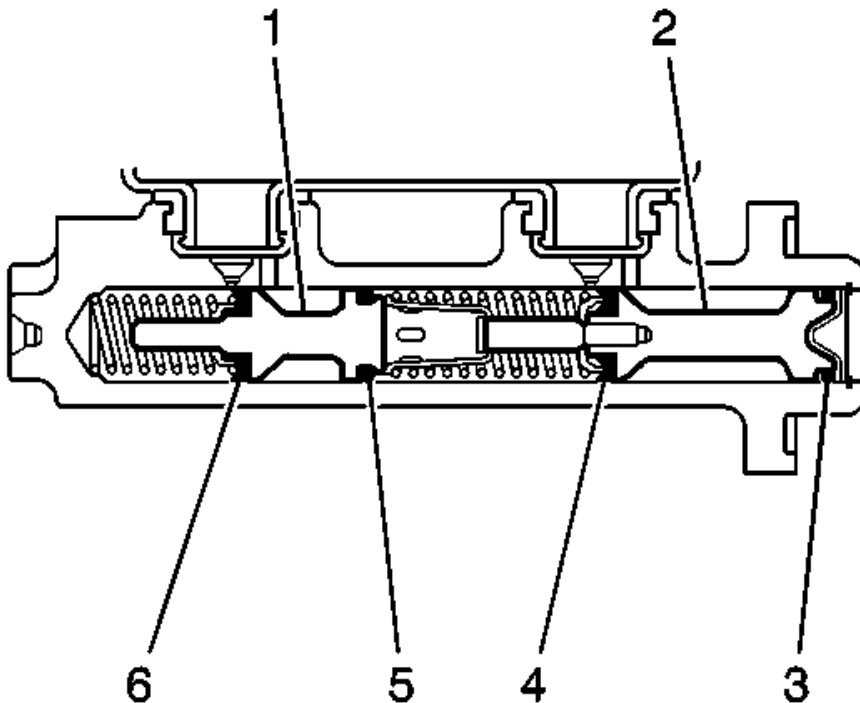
Identifying Brake Master Cylinder (Cross Sectional View)
